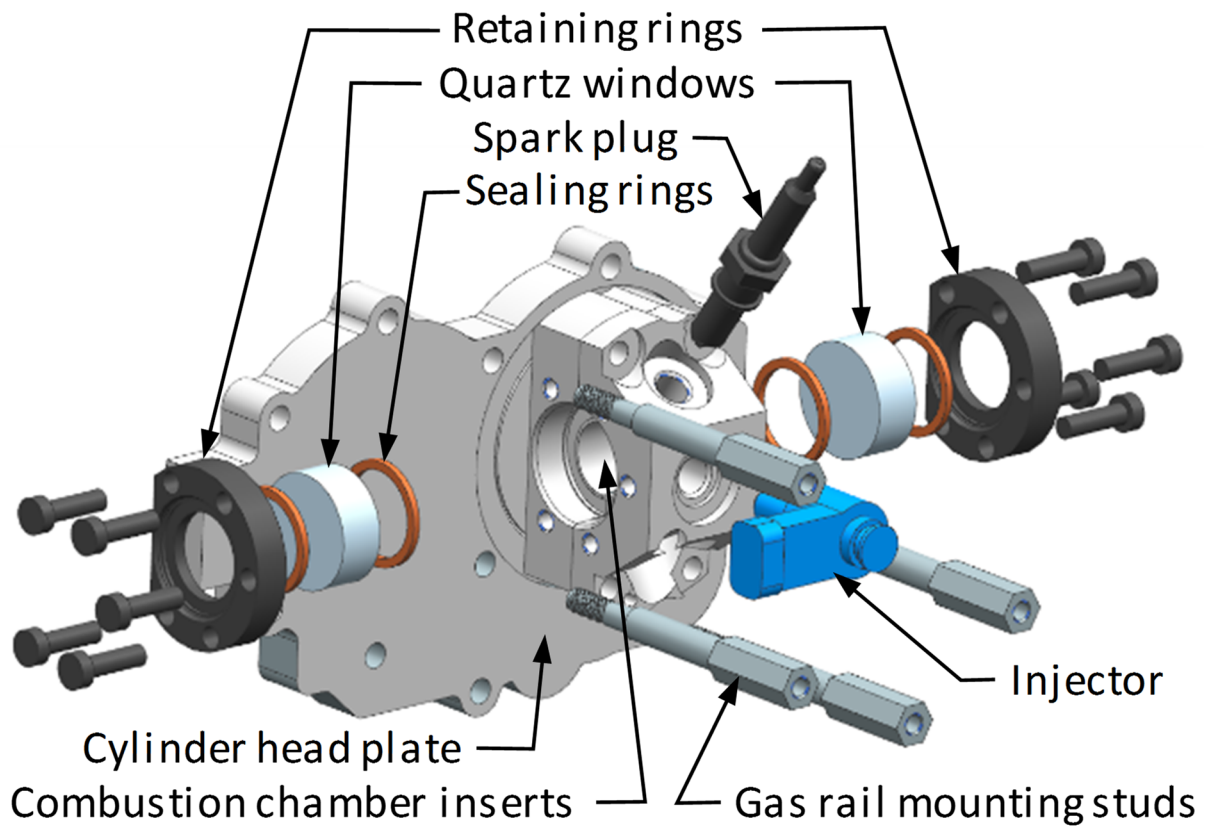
Exploded view of optically accessible cylinder head (non-vortex combustion chamber shown).
